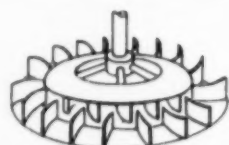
Shrouded Turbine. Johnson-Turbo-Mixer—1913.
